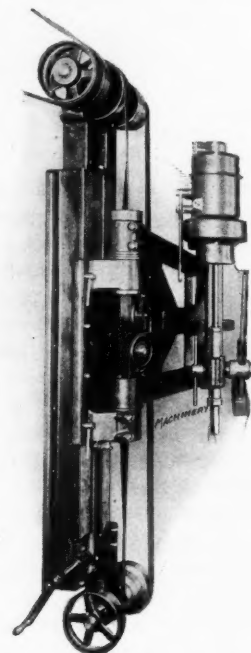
Machine shown in Fig. 1 with Arm Closed
